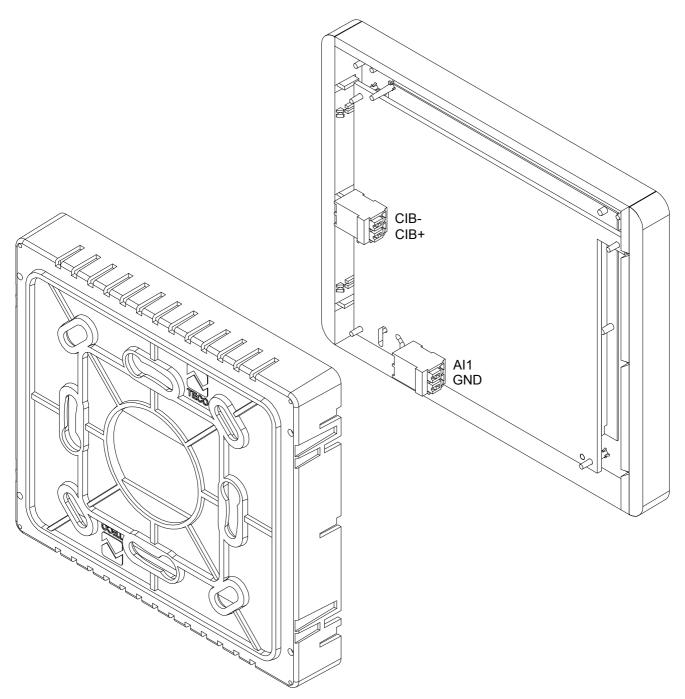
The placement of the connector on the rear side of the housing of the C-RC-0011R module
